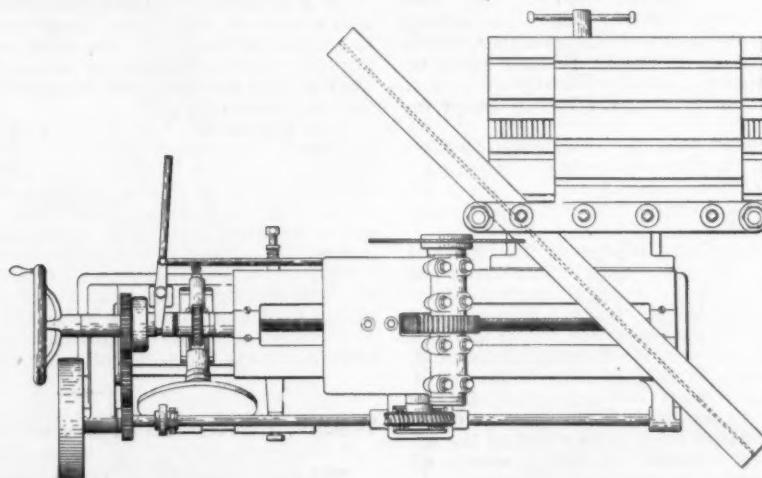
Cutting Beam at an Angle of 45°, Machine without Motor.
